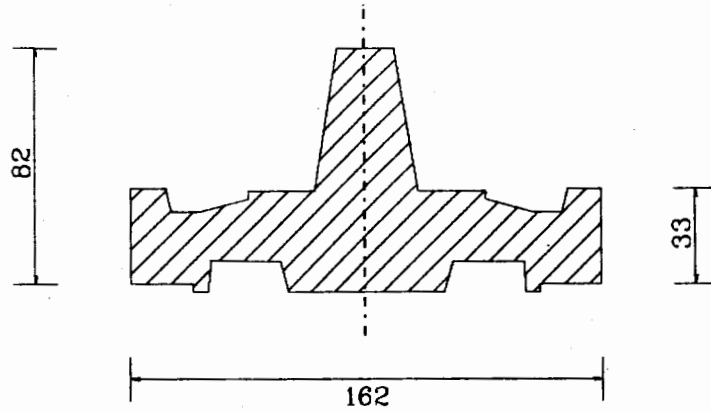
Cross section of the axisymmetric wheel hub casting. Dimensions are in millimeters.
